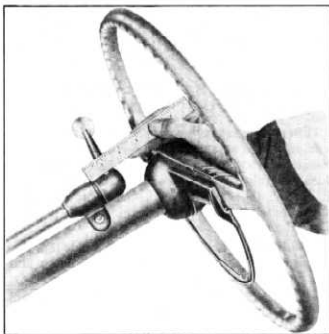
Checking Gearshift Lever to Upper Support Clearance
